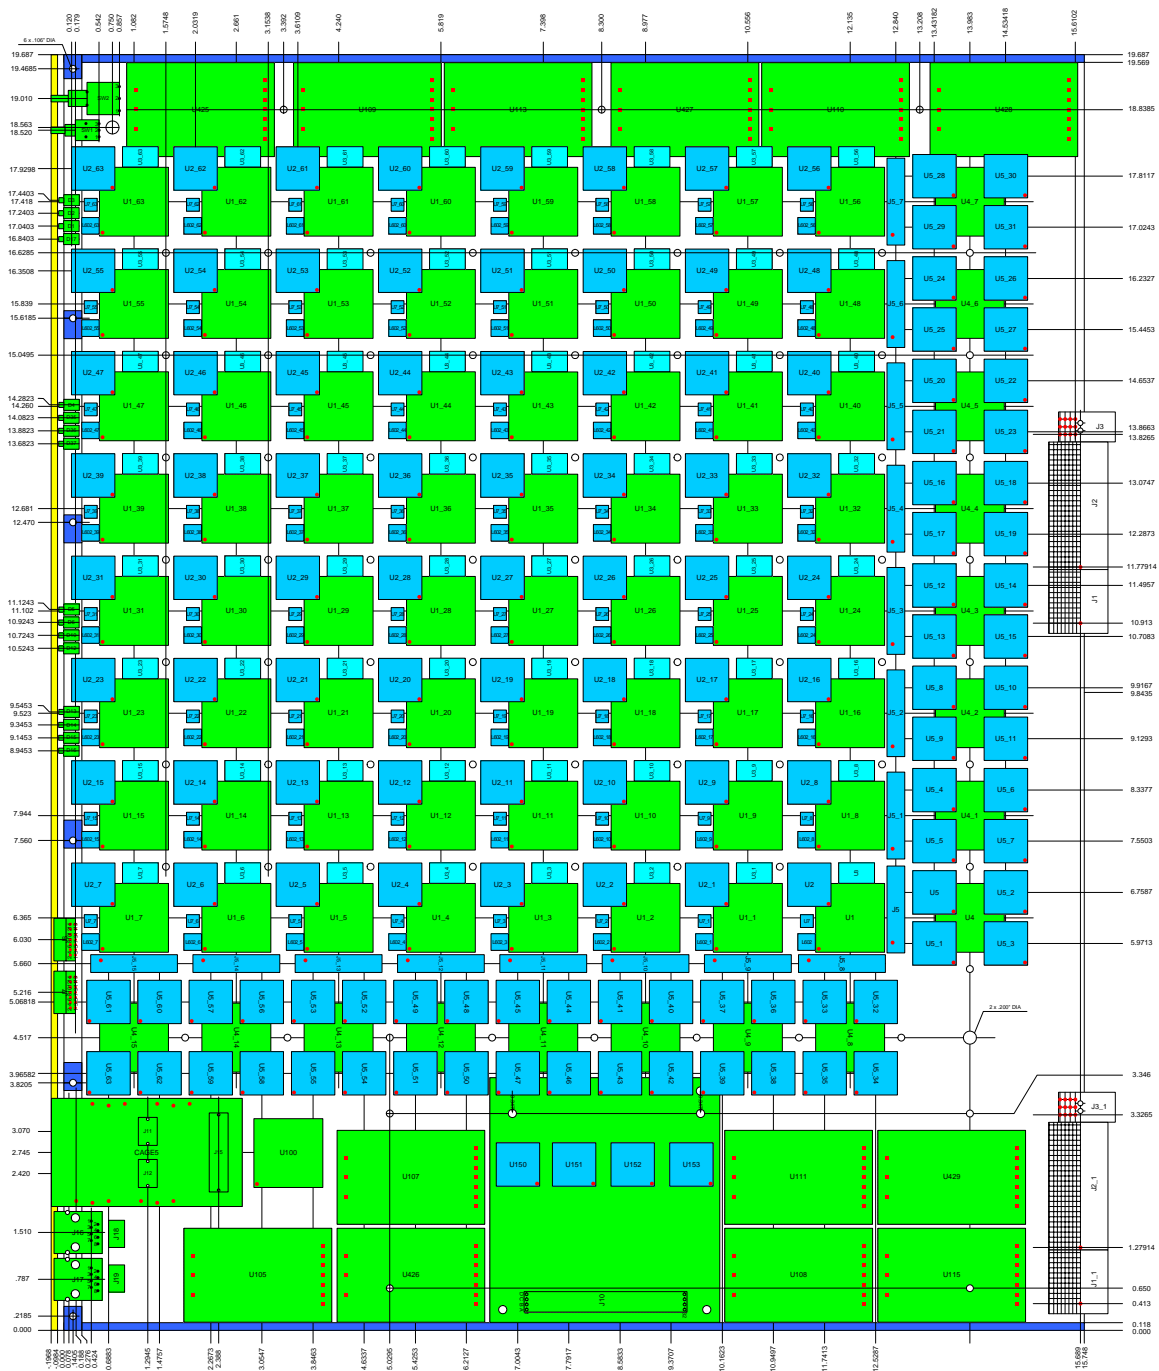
Baseline Board preliminary layout diagram. This board is the most complex board in the system because of number of devices, and because it requires double-sided BGA surface mounting.
